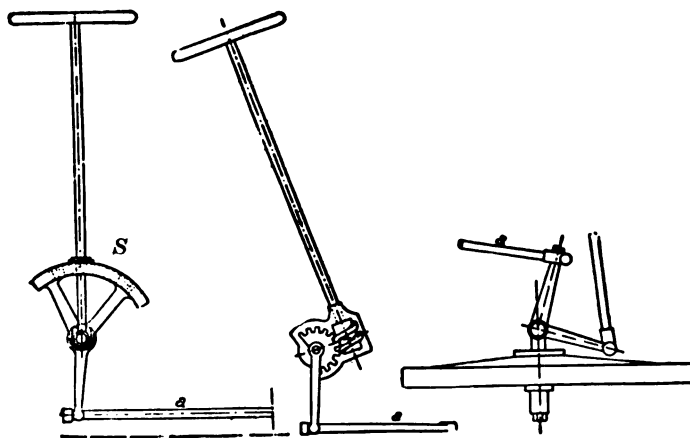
PRINCIPLE OF THE NON-REVERSIBLE WORM AND SEGMENT STEERING GEAR.
